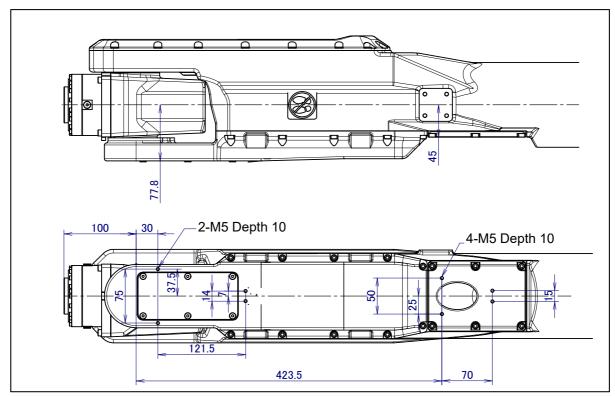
(d) Equipment mounting faces (for the cable clamp) (M-20iA/20M/35M)
